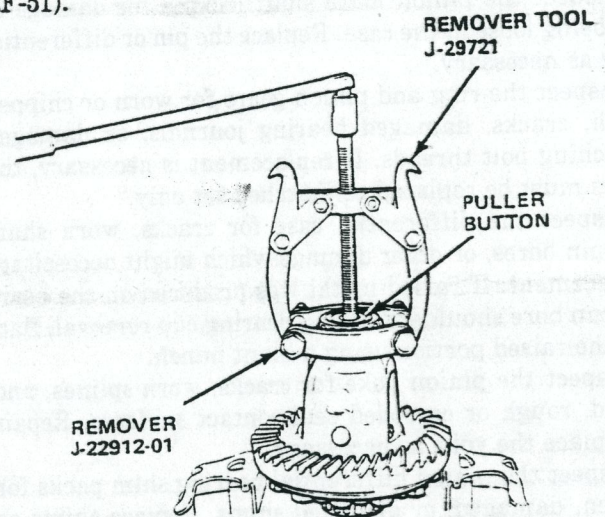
F-51 Differential Bearing Removal—Model 60 Axle
